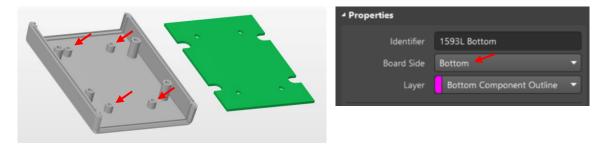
the 3D model of the PCB will be used to define the shape of the PCB. We will then fit the PCB into the bottom part of the enclosure to be able to precisely place components in regards to the enclosure. Notice the standoffs (slo. nosilci, distančniki) which hold the PCB in place. Also, set the "Board Side" parameter for the bottom part of the enclosure (right figure).
